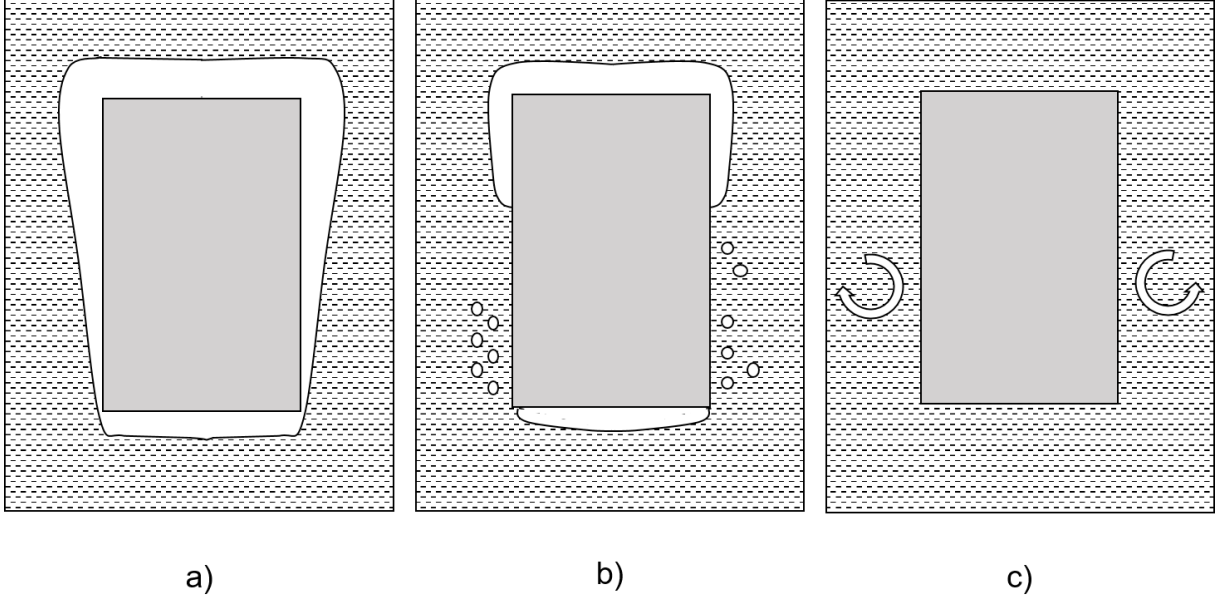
A conceptual sketch of immersion quenching process: (a) film boiling mode; (b) rewetting of the specimen surface; (c) single-phase convection heat transfer.
